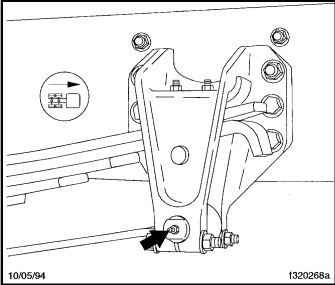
, Forward Spring Bracket Spring Pin Grease Fitting
